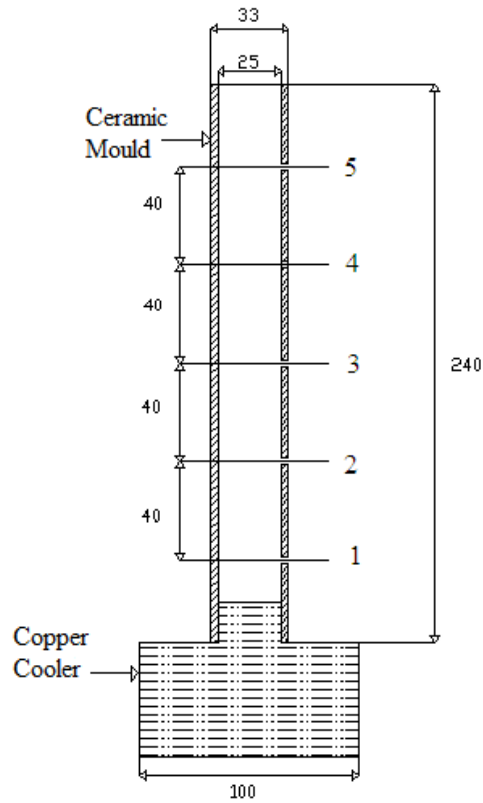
Cross sectional view of ceramic mould that cooled with copper that used at the casting process
